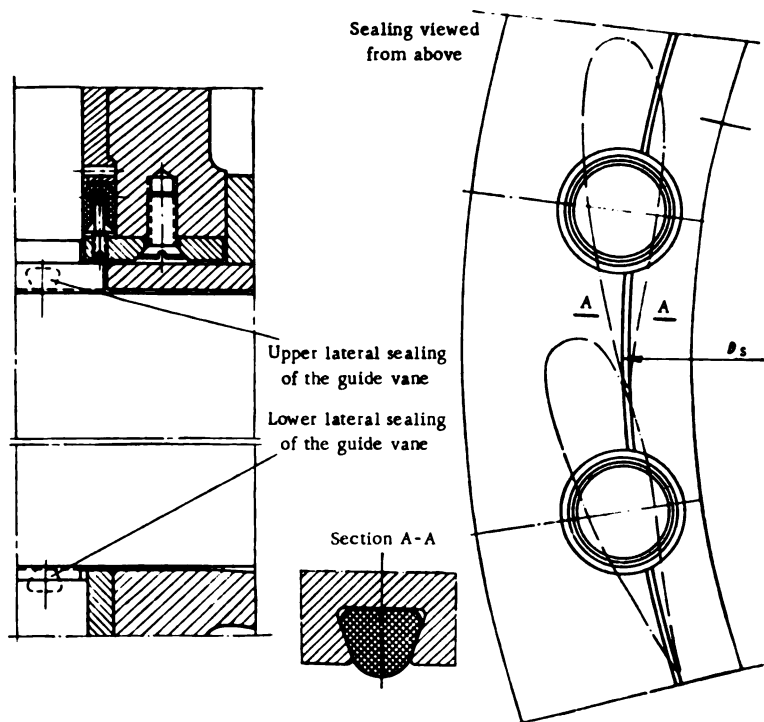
Seals of the lateral guide-vane surfaces
